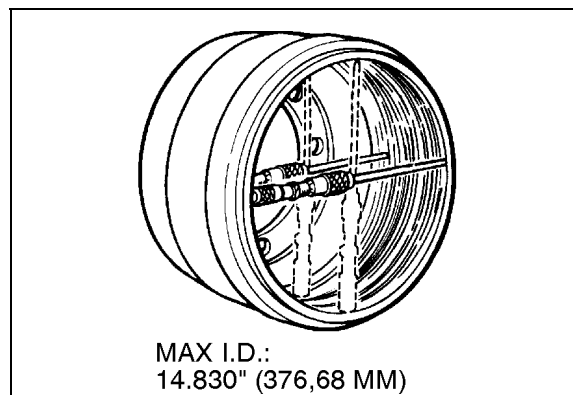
DRUM BRAKE INSIDE DIAMETER 12046
